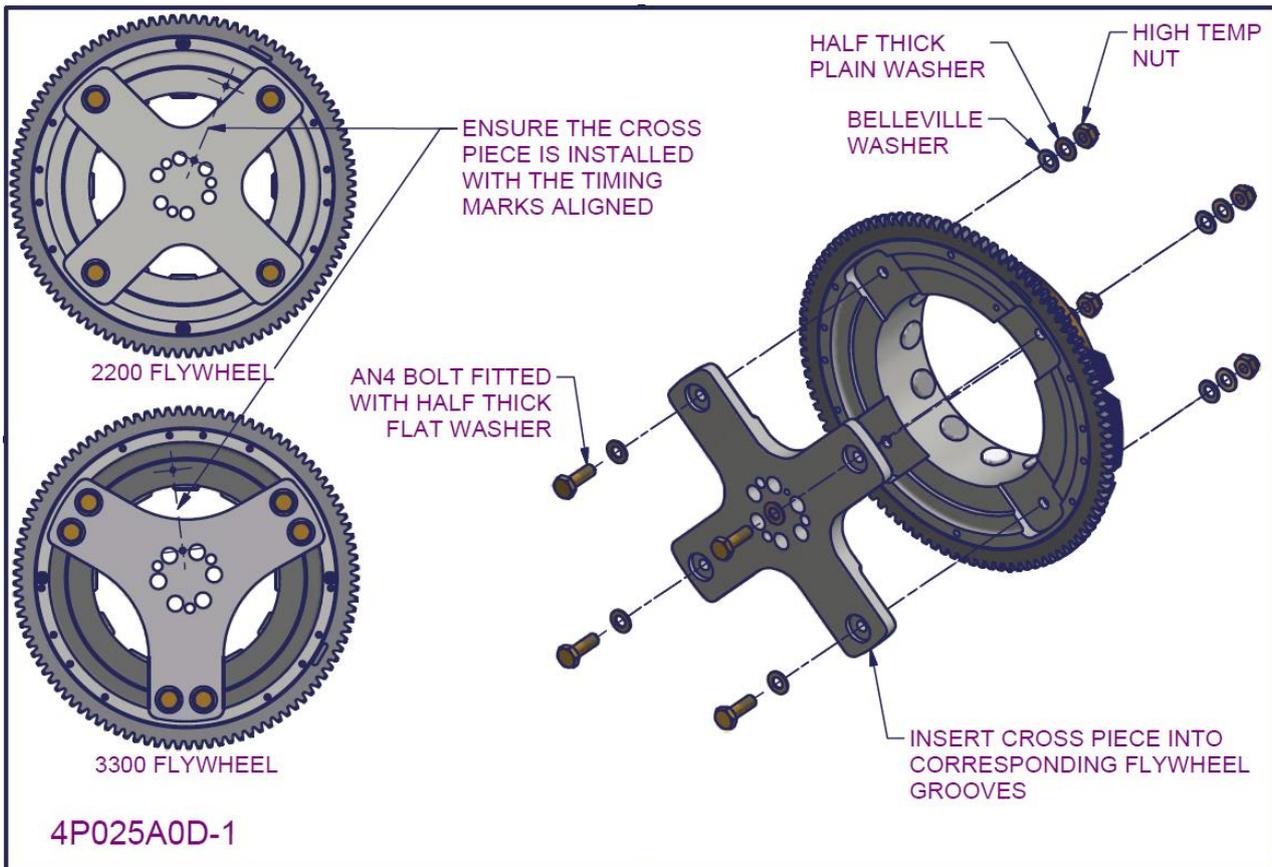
2200/3300 Flywheel subassembly (aluminium cross piece) 4
